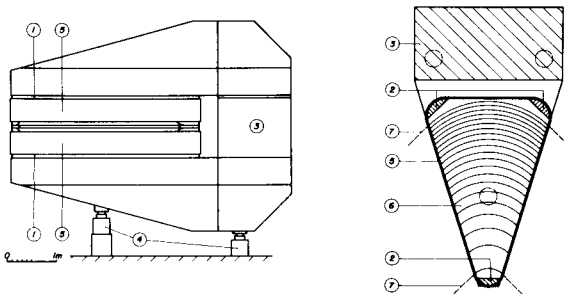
Side view (a) and cross-section (b) of a single sector magnet comprising (1) pole tips (2) distance pieces for pole gap (3) yoke parts (4) supporting legs (5) main excitation coils (6) trim-coil sheets (7) equilibrium orbits at injection and extraction.
